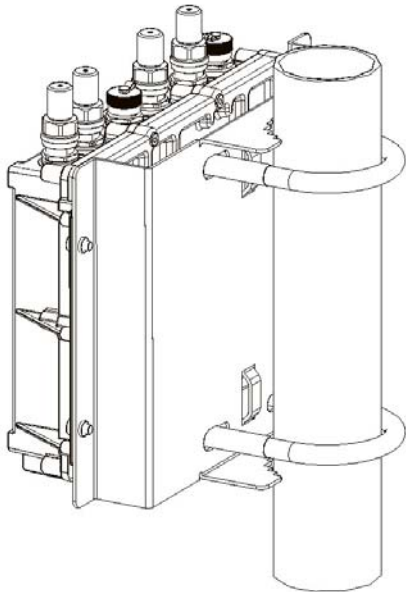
BAT450-F pole mounting set with enclosed U-bolts
